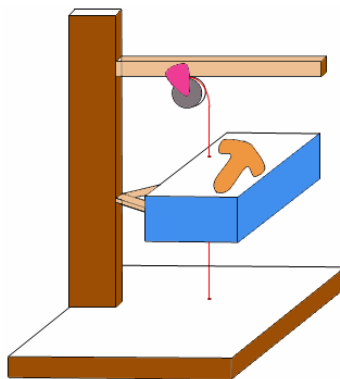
Cutting a T-shaped profile using a CNC wire-cut machine
